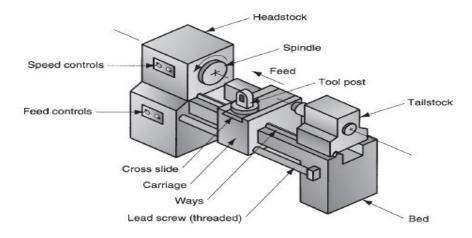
Diagram of an engine lathe, indicating its principal components
